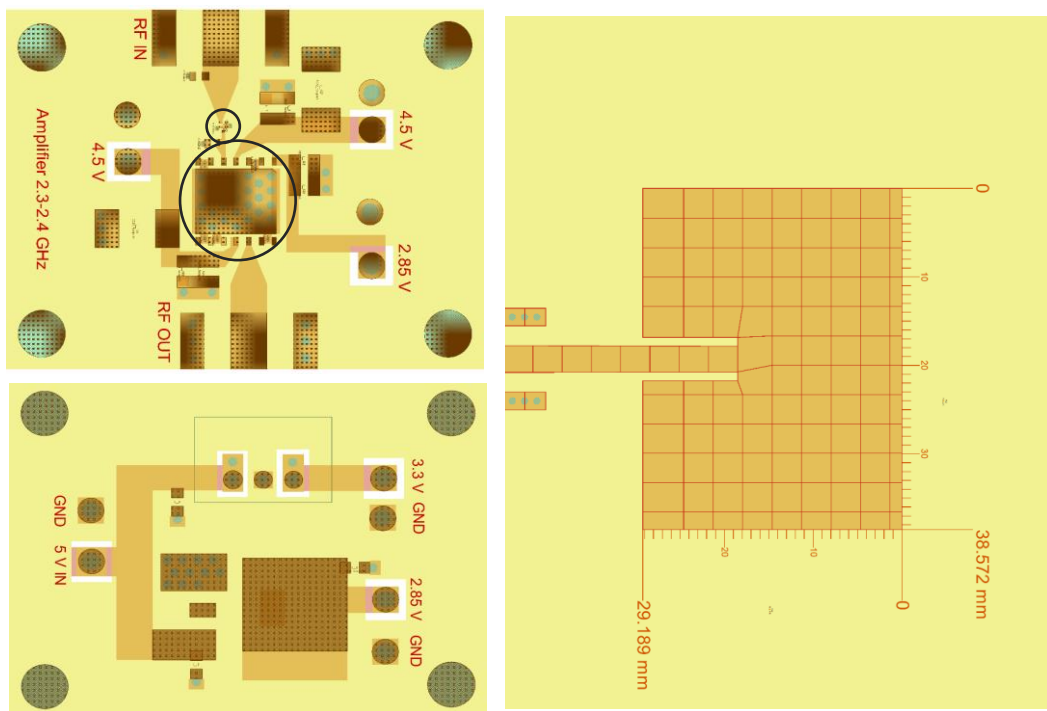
The final edition of the three designed PCB layouts. Top-left is amplifier and filter PCB. Bottom-left is voltage regulation board. To the right is the patch antenna. The small and large circle on the amplifier PCB layout marks the placement of the band pass filter respectively the amplifier.
